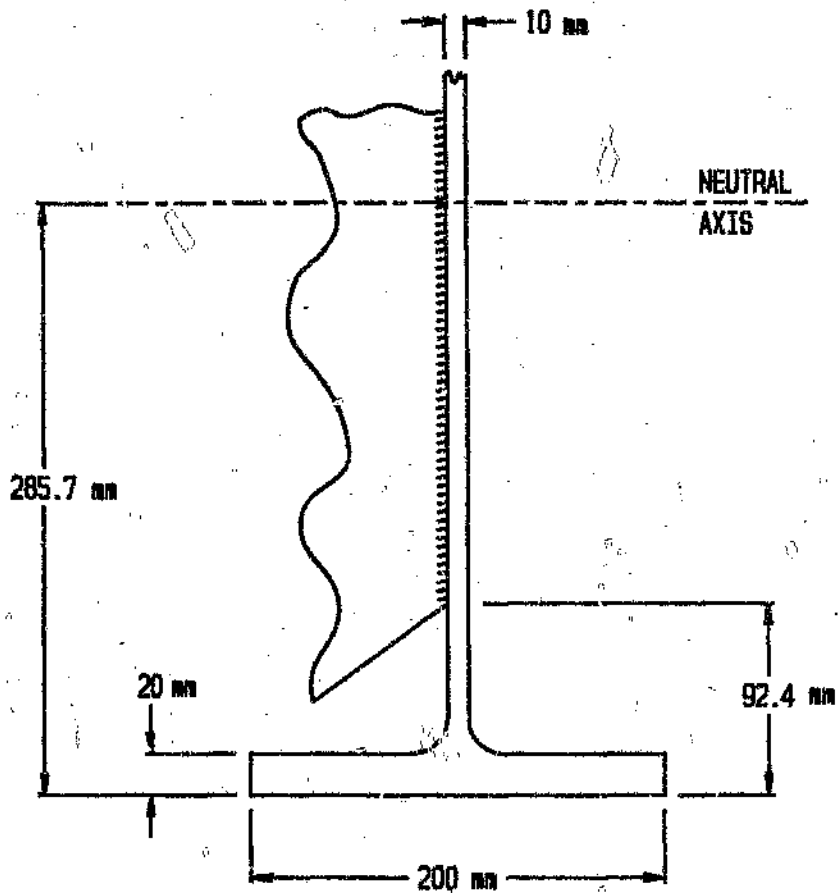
Chassis I-beam cross-section at foremost landing leg mounting bracket weld
